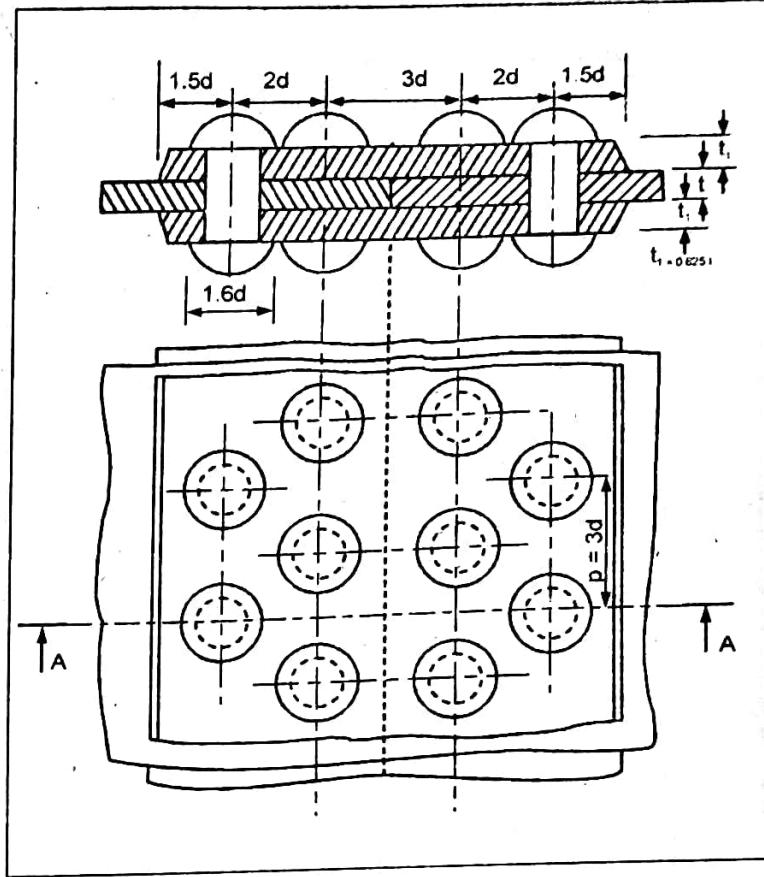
Double Riveted Double Cover Plate (Zig-Zag Butt Joint)
